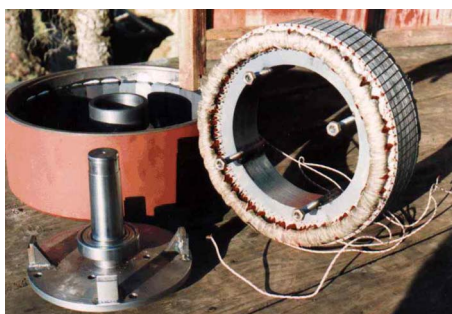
(Color online) African Wind Power type 3.6 wind turbine. Blades (not shown) bolted to the rotating red magnet assembly at top left. This alternator uses a stationary coil assembly (right) which is mounted on the shaft and back plate (bottom left). There are no moving wires, slip rings, or brushes.
